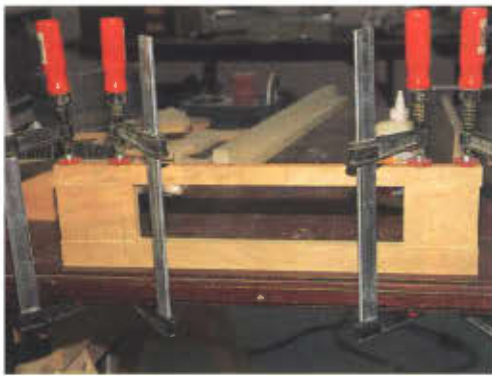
Gluing the front apron together again after the drawer front has been cut out makes a very attractive finished appearance.
